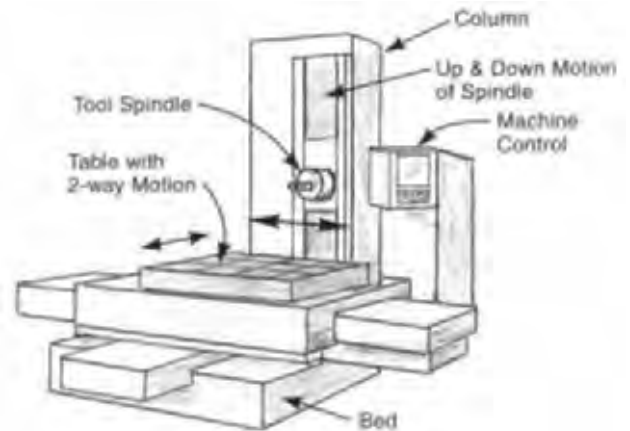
B5b A horizontal boring mill. This machine can perform boring, milling, and drilling operations.
